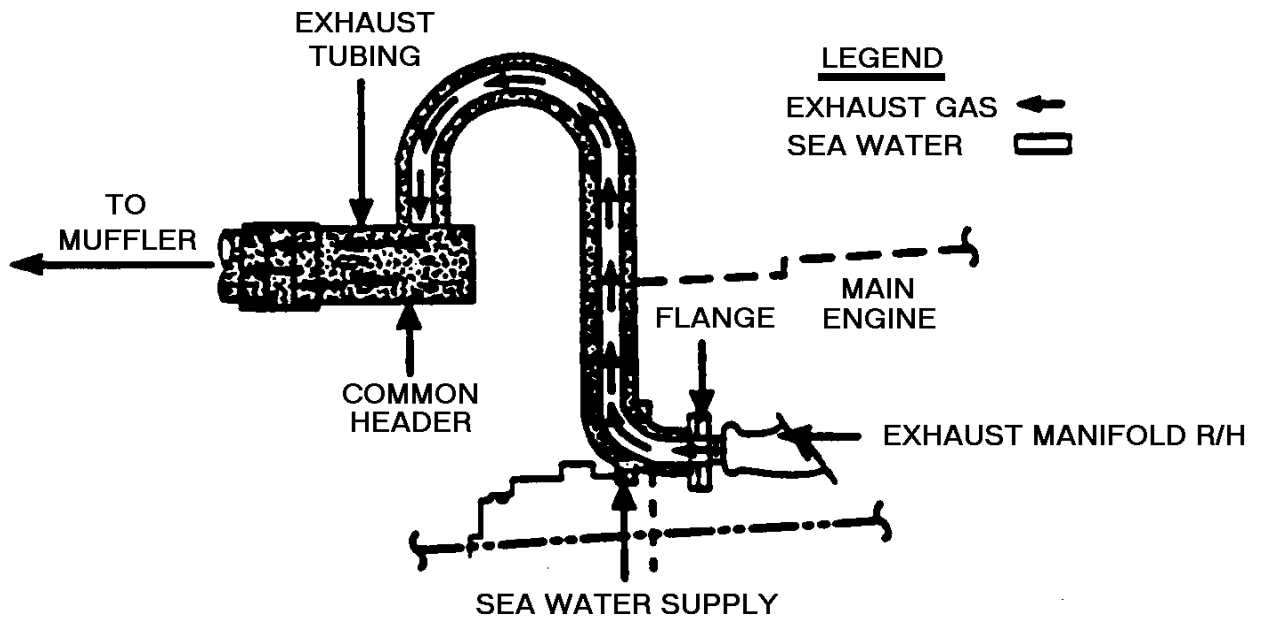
Typical Water Jacketed Elevated Loop<sup>12</sup>
